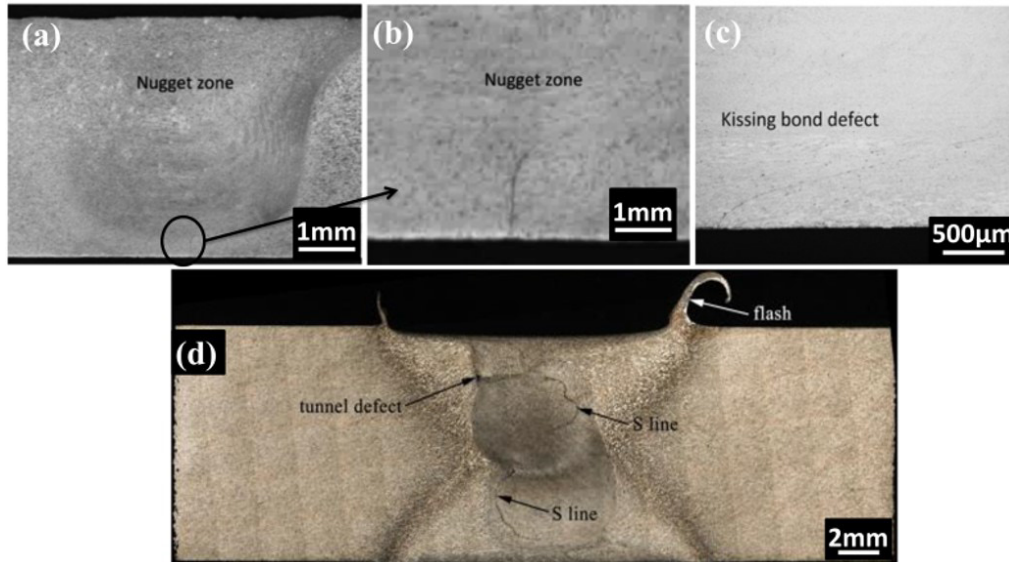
AA7475-T7351 weld cross-section showing defects formation in conventional FSW(a, b) Lack of penetration at 300 rpm rotational speed (N) and 150 mm/min welding speed (V) [156] (c) Kissing bond at N of 500 rpm and V of 400 mm/min [156] (d) AA7085-T7452 weld cross-section showing tunnel, S-line and flash defect formation in Double Sided FSW at N of 950 rpm and V of 60 mm/min [157].
